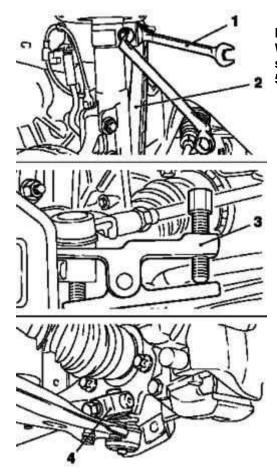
Disconnecting the levers and pivots chassis: 1 - Wrench, 2 - lever pipe support rack springs, 3 - a special device KM-507-C; 4 - steering knuckle joints
